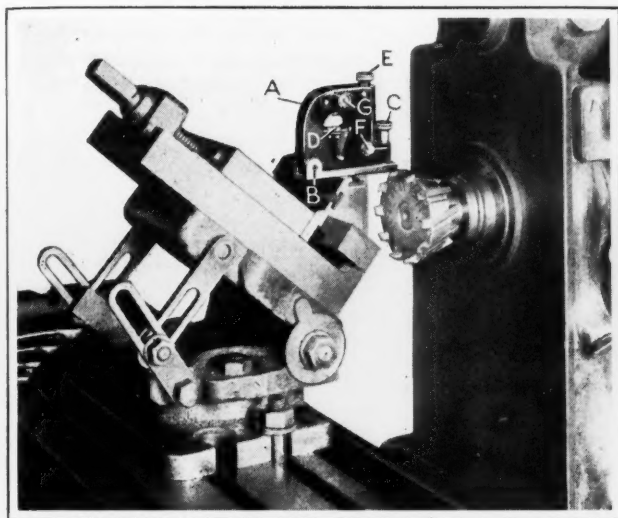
Employing an Optical Bevel Protractor to determine the Accuracy of a Level Surface
